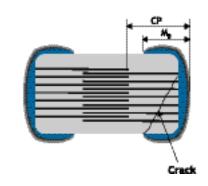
Open-mode design (CP>MB) – circuit open during cracking.
